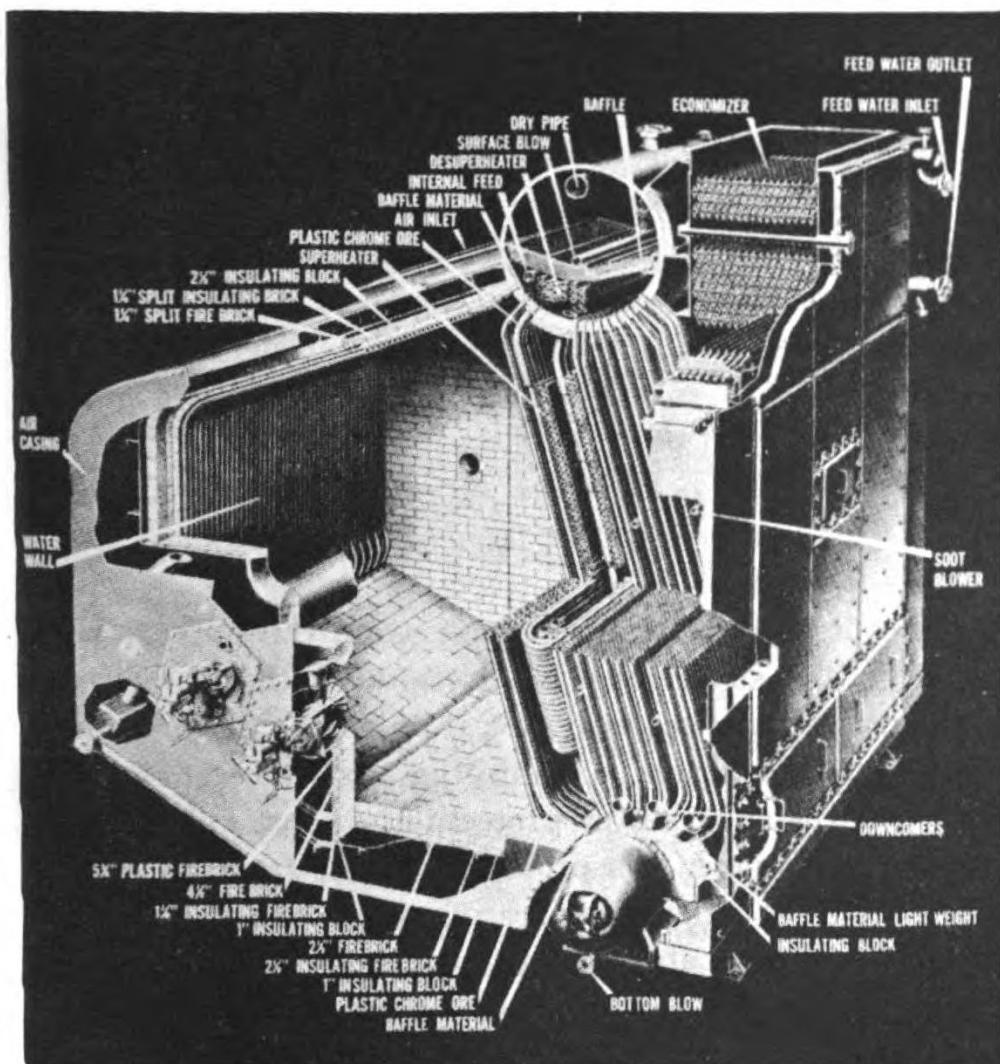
Cutaway view of destroyer escort boiler (modified D-type).
